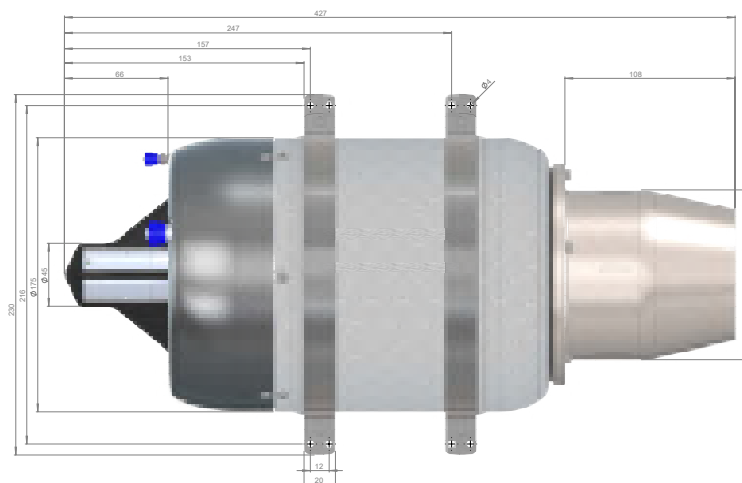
Technical Drawing of JetCat P550 PRO Turbojet Engine
